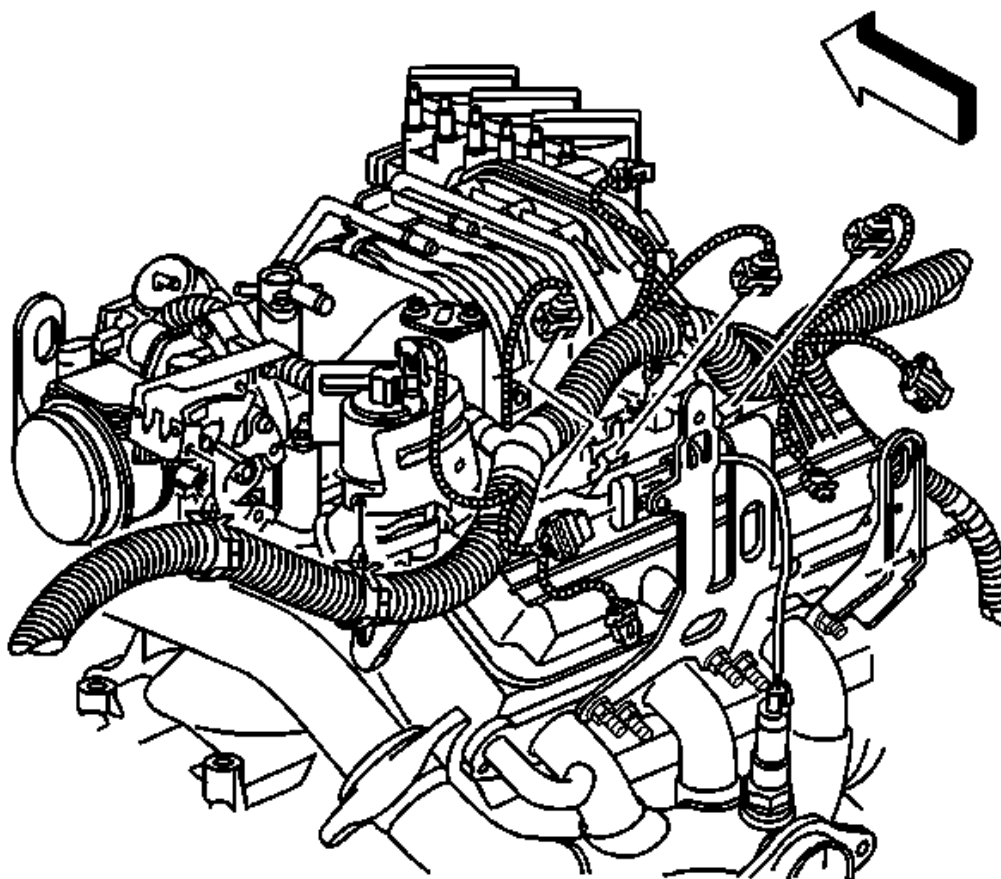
View of Wiring Harness Connectors from Right Side of Engine Components
